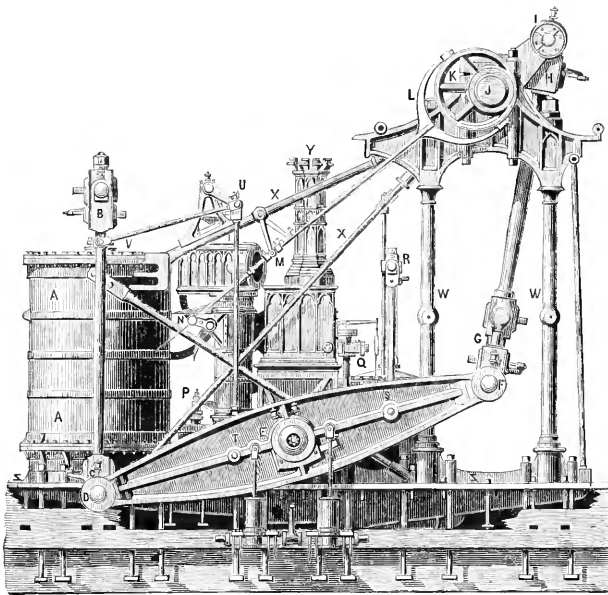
THE SIDE-LEVER ENGINE, 1849.
